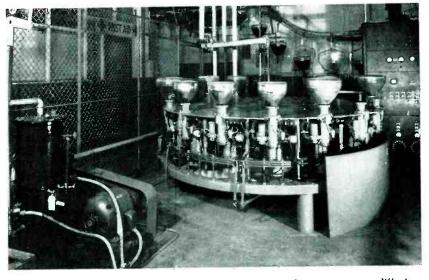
In this aluminizer machine, each tube position has a separate diffusion pump and electrically operated roughing and bypass valves. Mechanical backer pump at left connects through a rotating joint
